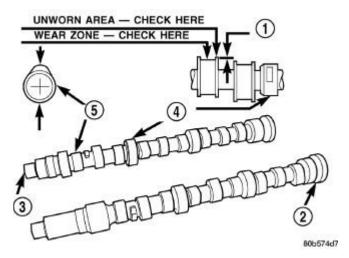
Camshaft Inspection Courtesy of CHRYSLER LLC
